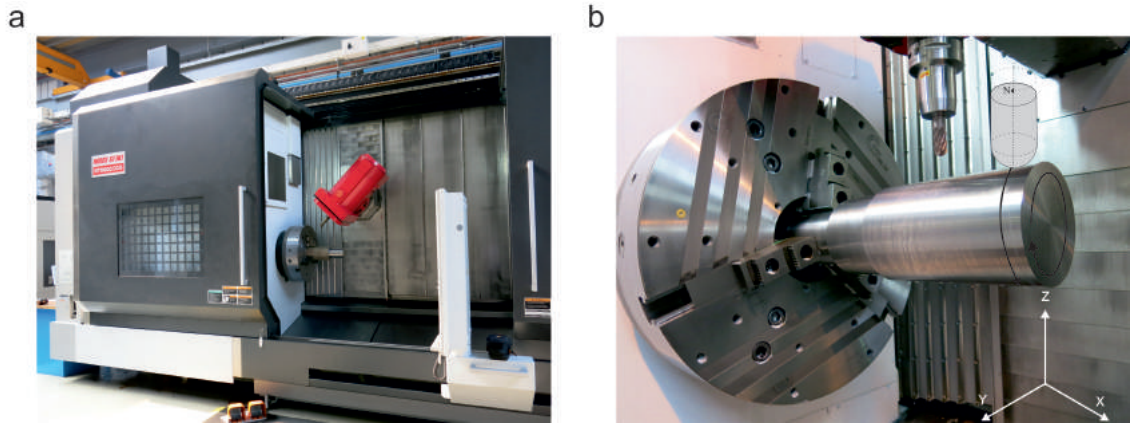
Photograph of a. the Mori Seiki NV 6600 mill-turn machining centre and b. 20 mm ball nose end mill tool, holder assembly and billet with superimposed schematic representation of fundamental orientations.
